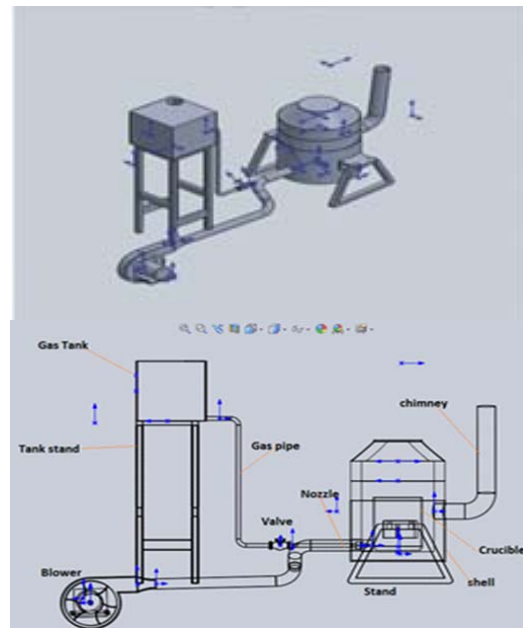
3-D model of the furnace and wire frame of furnace assembly
